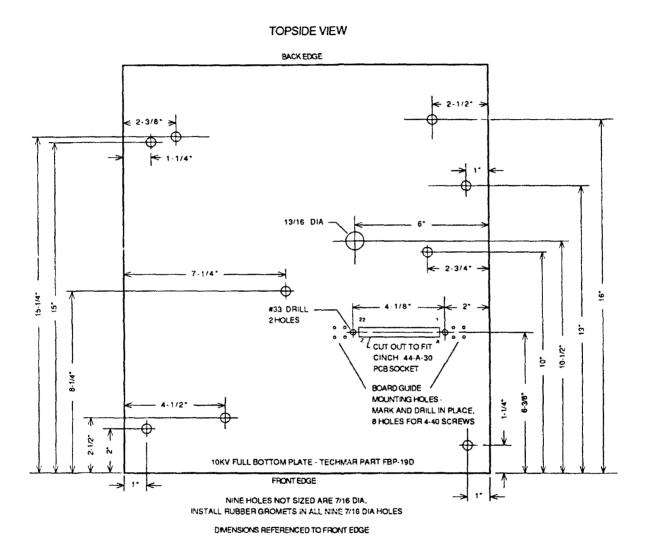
10-kV BOTTOM MOUNTING PLATE CUT AND DRILL GUDIE
